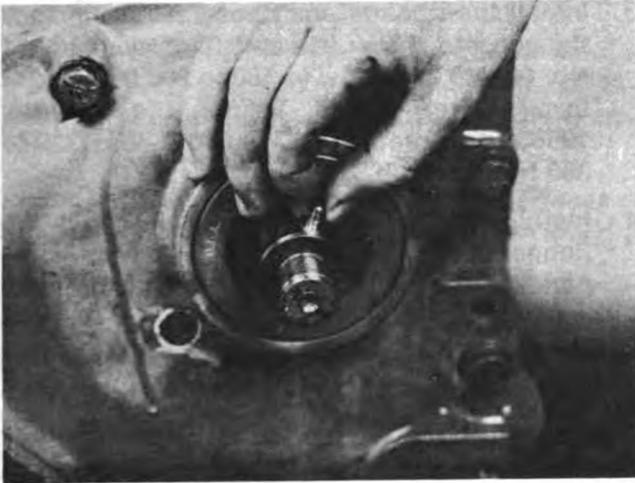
(N114289). Install The Pin Into The Accessory Drive Shaft.
